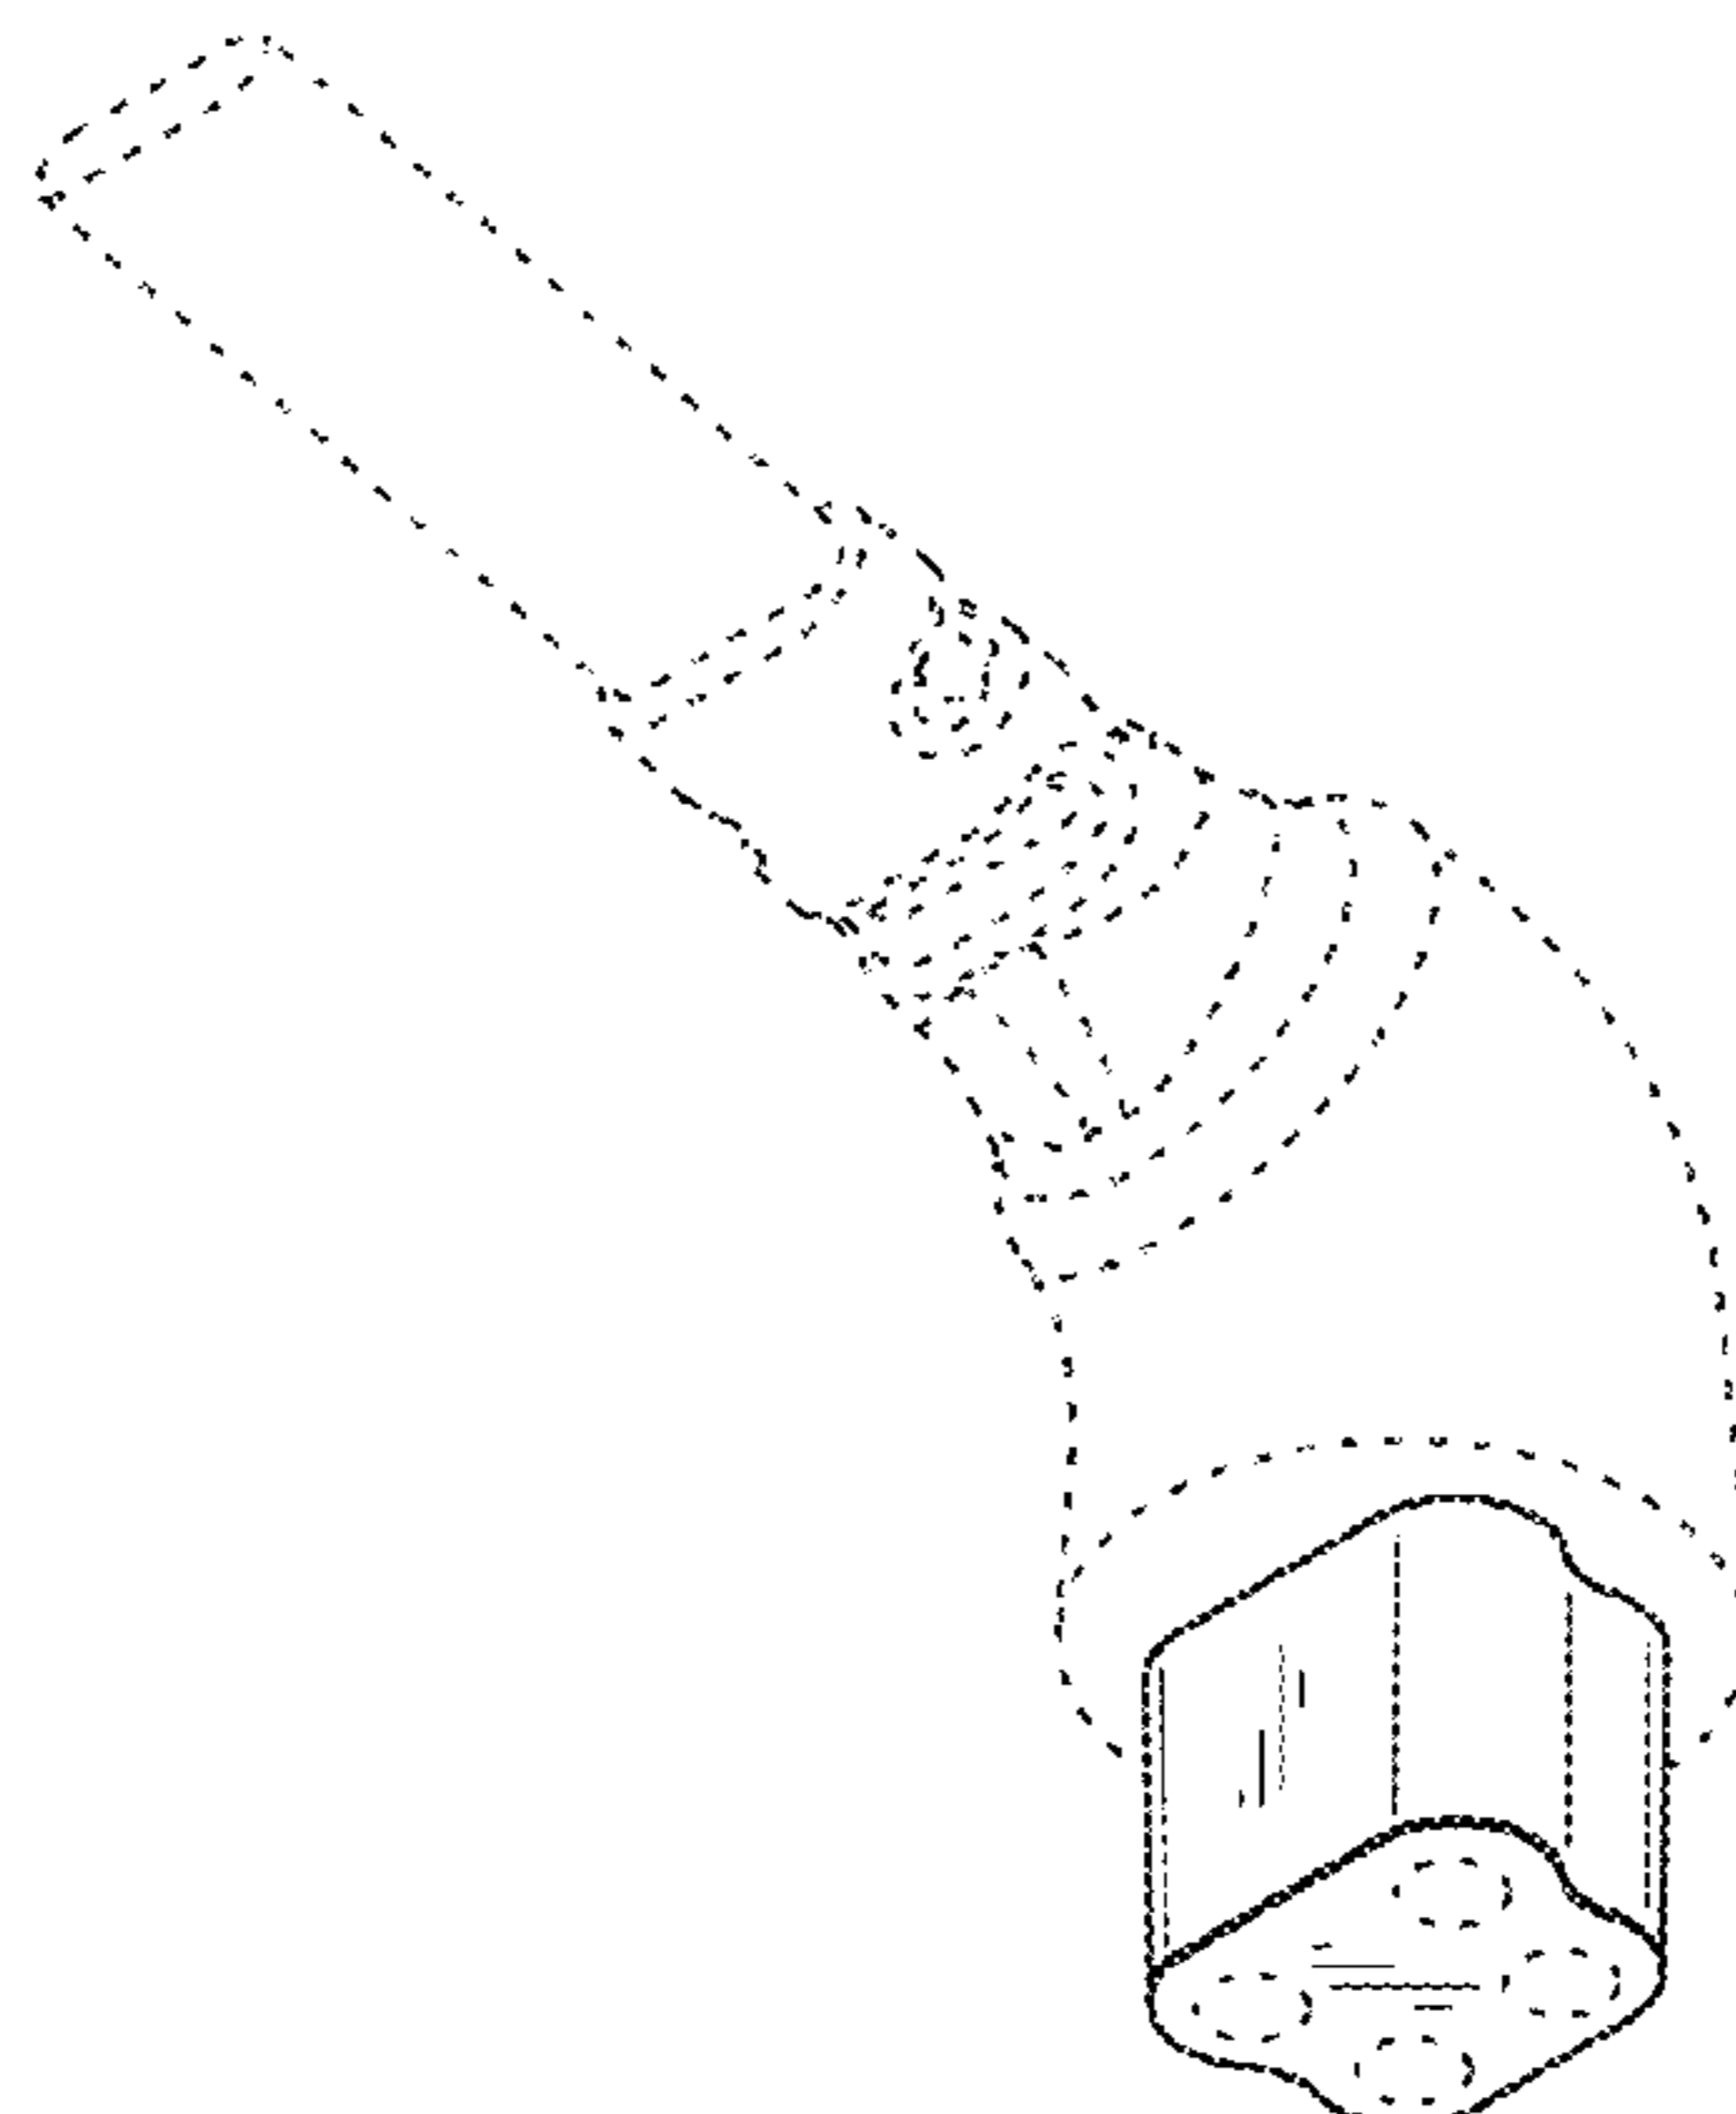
is a front, bottom perspective view of a cable connector, showing my new design.
